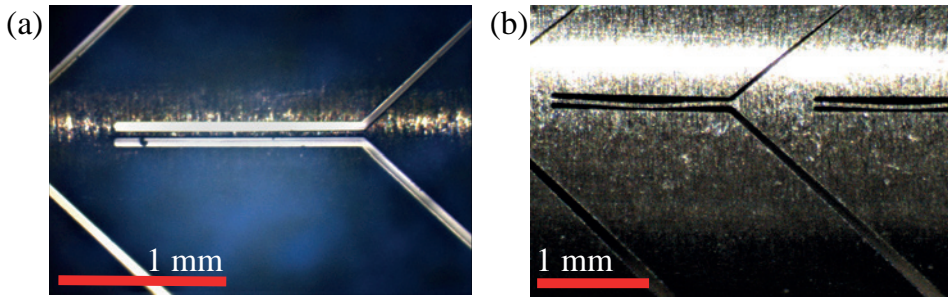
Microscopic images of metallic tubes showing (a) accurately machined flexures and (b) inaccurately machined deformed flexures.
